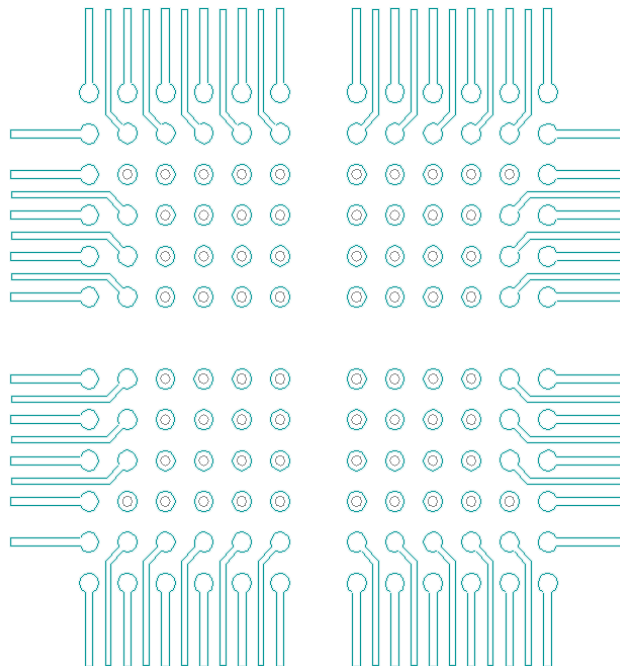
• Suggested Board Layout for NSMD of Soldered Pads for CS81 CSPs (PCB Top Layer)
